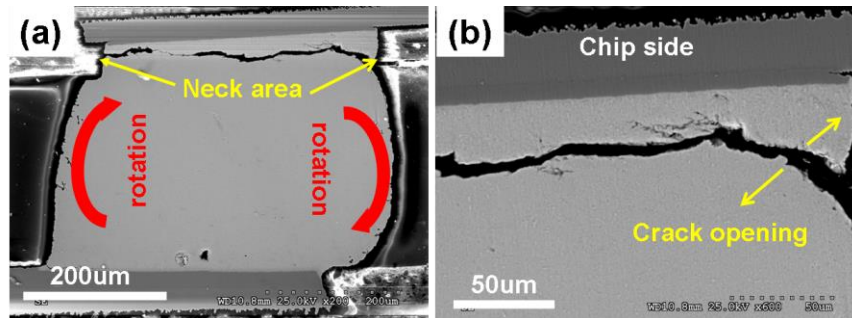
SEM cross section of the SAC105 solder after shear test (a) overview showing the neck area and solder rotation, (b) enlarged SEM showing the crack opening.
